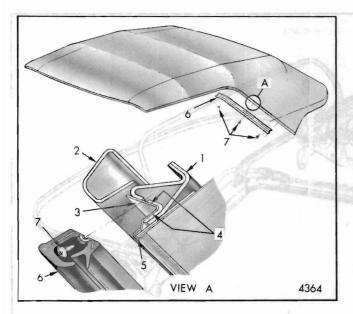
Side Roof Rail Rear Weatherstrip and Quarter Retainer Attachment
